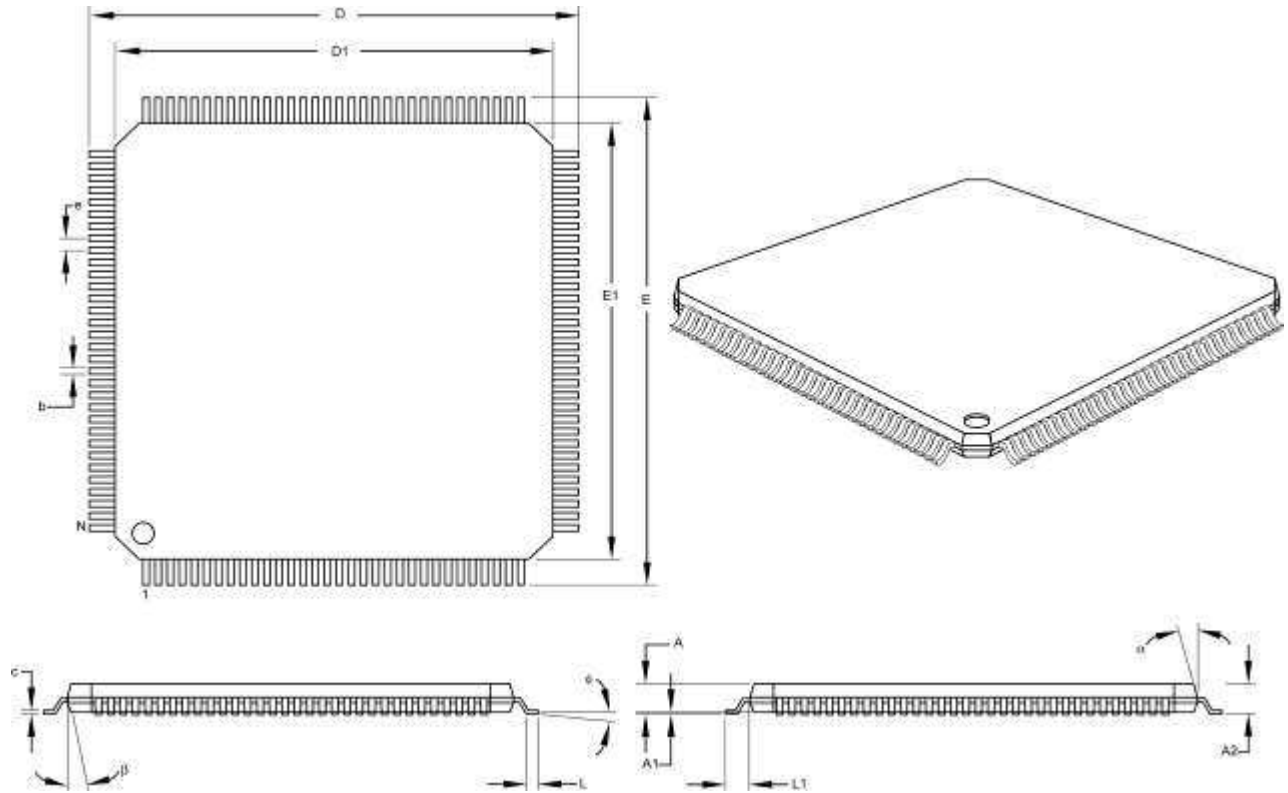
IA64F3048SEC2 128-Lead TQFP Physical Dimensions
